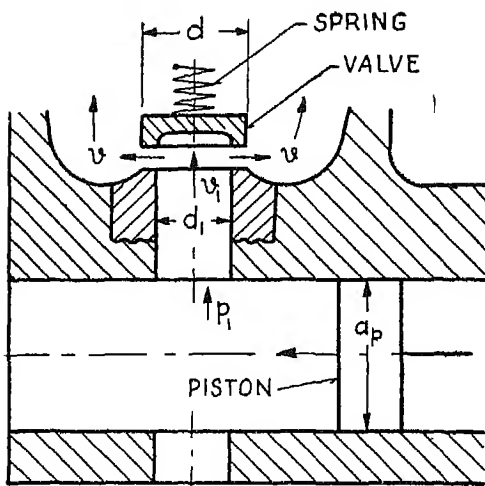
Valve of Reciprocating Pump, Being Opened
